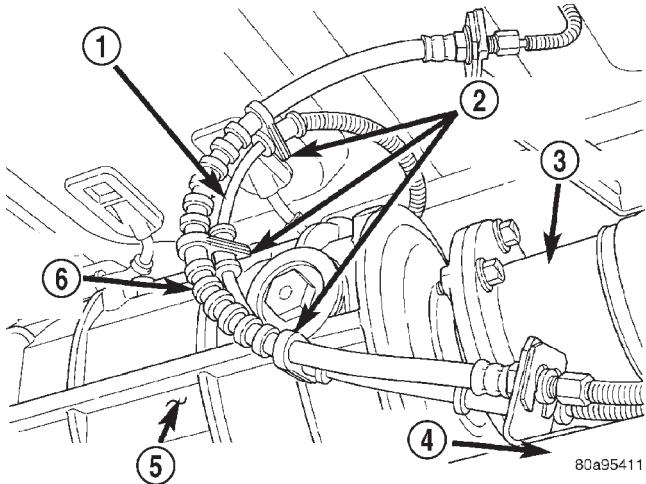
Speed Sensor Cable Attachment To Brake Flex Hose
